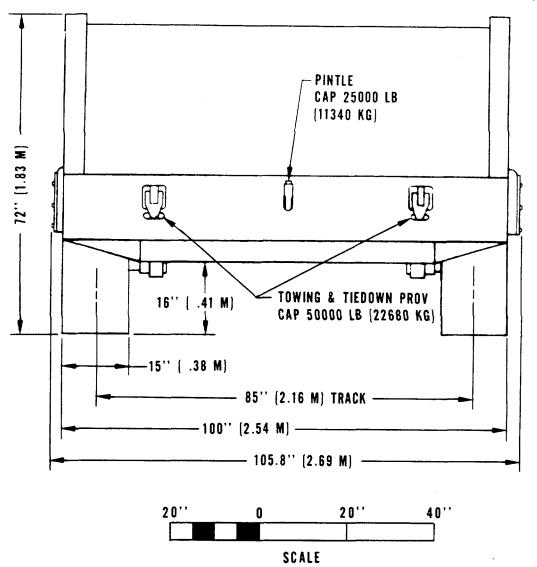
Transportability drawing, rear-end elevation, M1015 full-tracked cargo carrier with ground rod driver removed, for the Trailblazer system.
